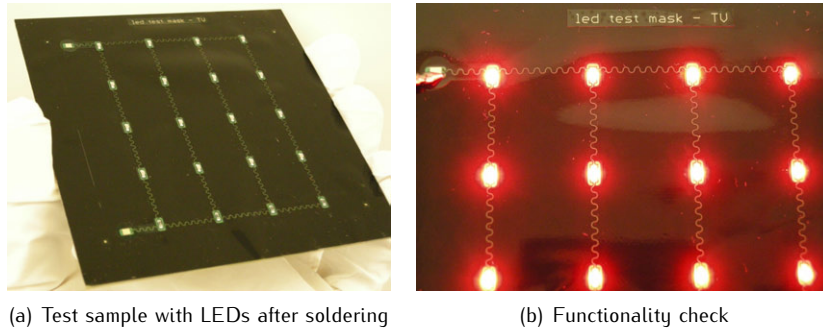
SMD reflow soldering, using a TacSil tape carrier board.
